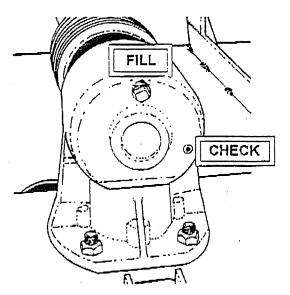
Gearbox Maintenance (Non-Removable Top)
